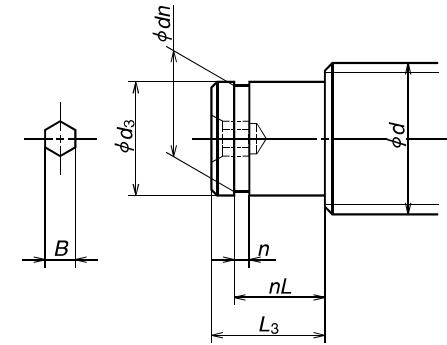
Shaft end configuration of R Series (opposite to the drive side)
